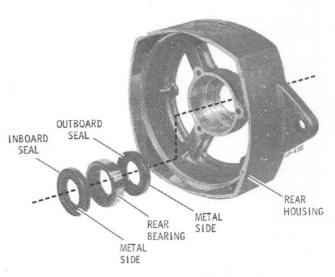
REAR BEARING & SEAL ASSEMBLY DETAIL
